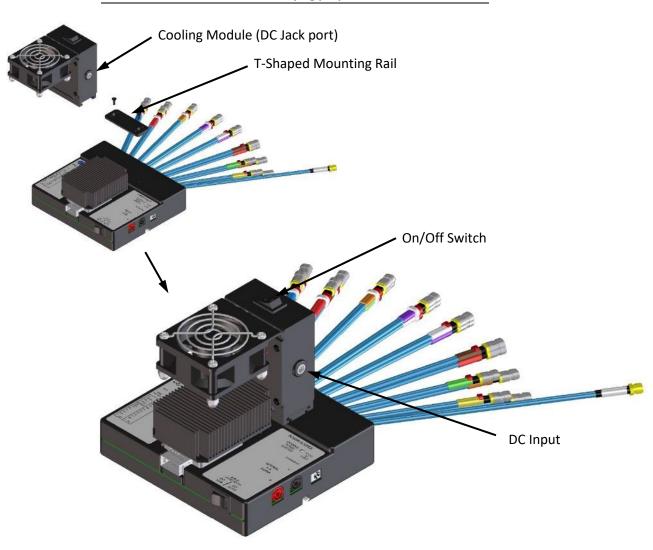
The QSFP-DD MCB (Receptacle) Test Adapter with Cooling Module
